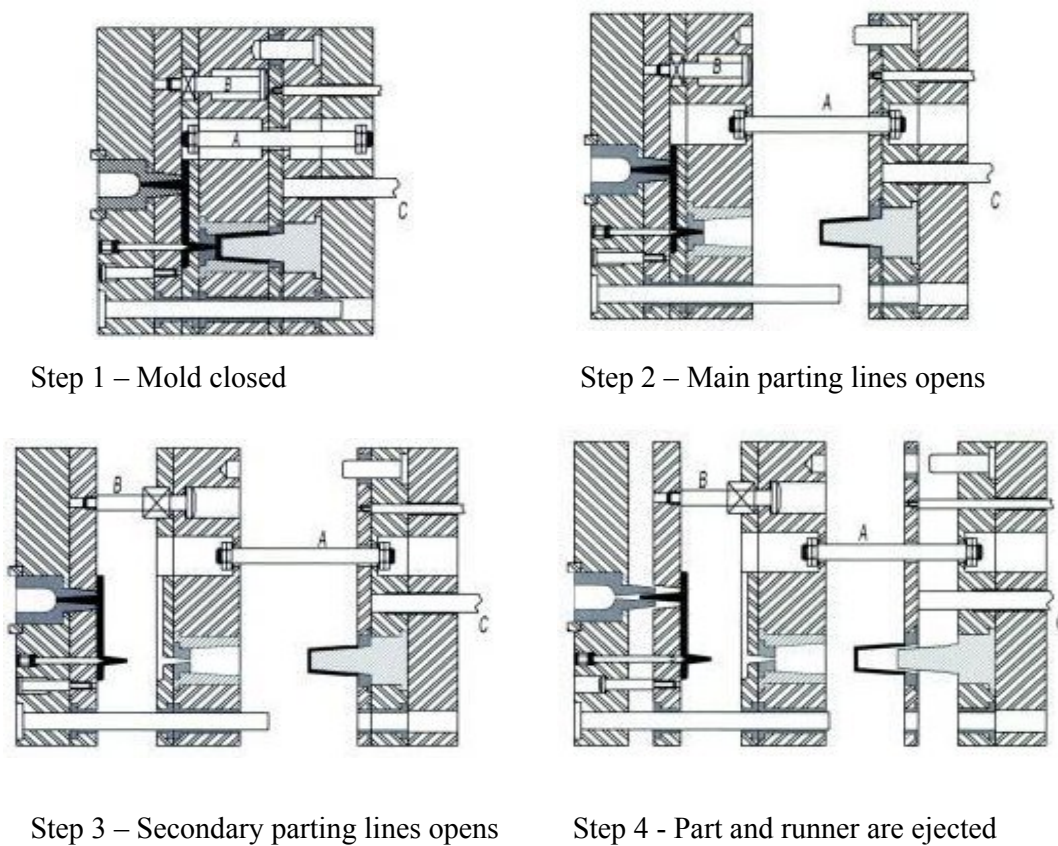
Opening and ejection action of a three plate mold with a hot sprue
